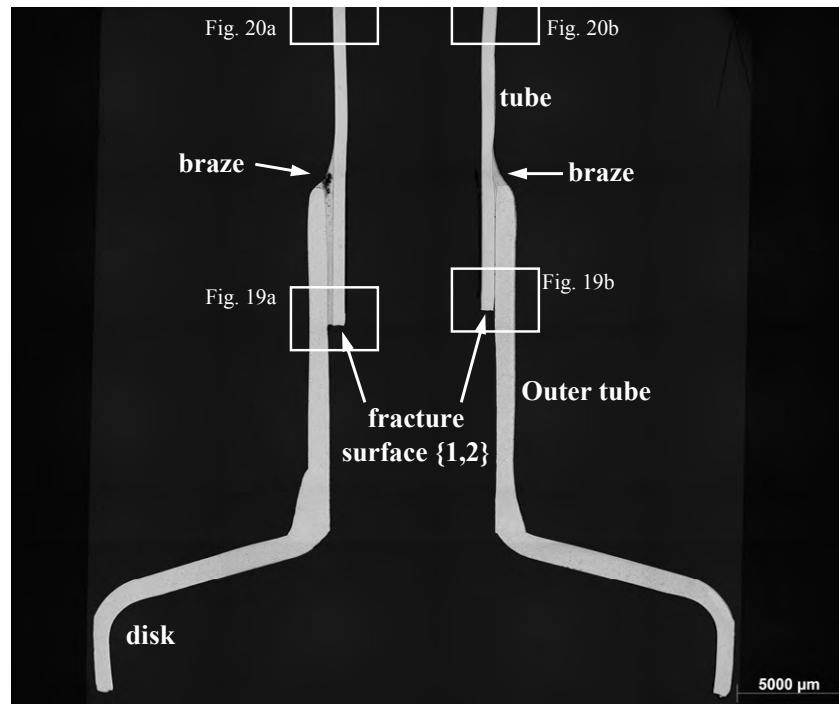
Optical microscopy image of the cross-section of tube section 2 with fracture surface {1,2}
